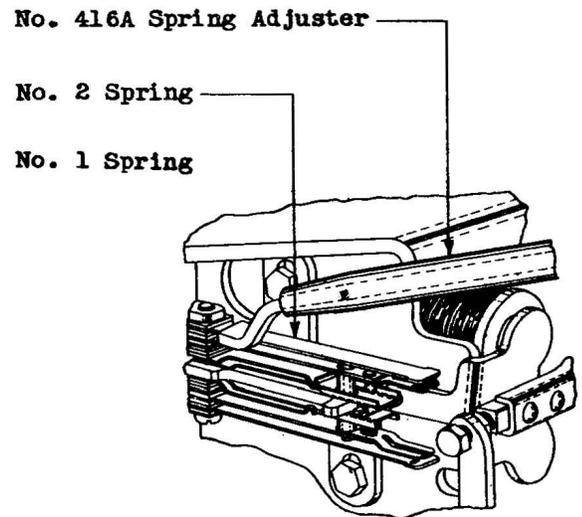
Fig. X - Method of Adjusting Springs for Straightness and Clearance
